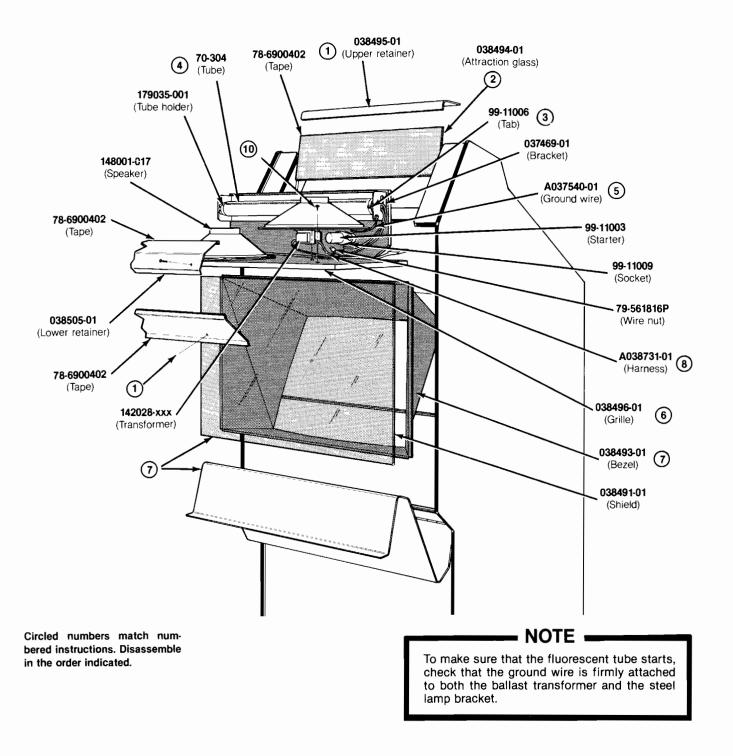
Fluorescent Tube and Speaker Upright Cabinet A038504-01 & -02 A
